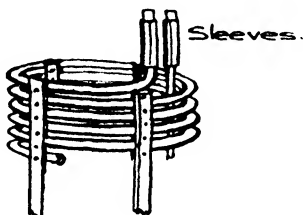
Top Portion of a Cooling Coil showing Welded-on Sleeves.
